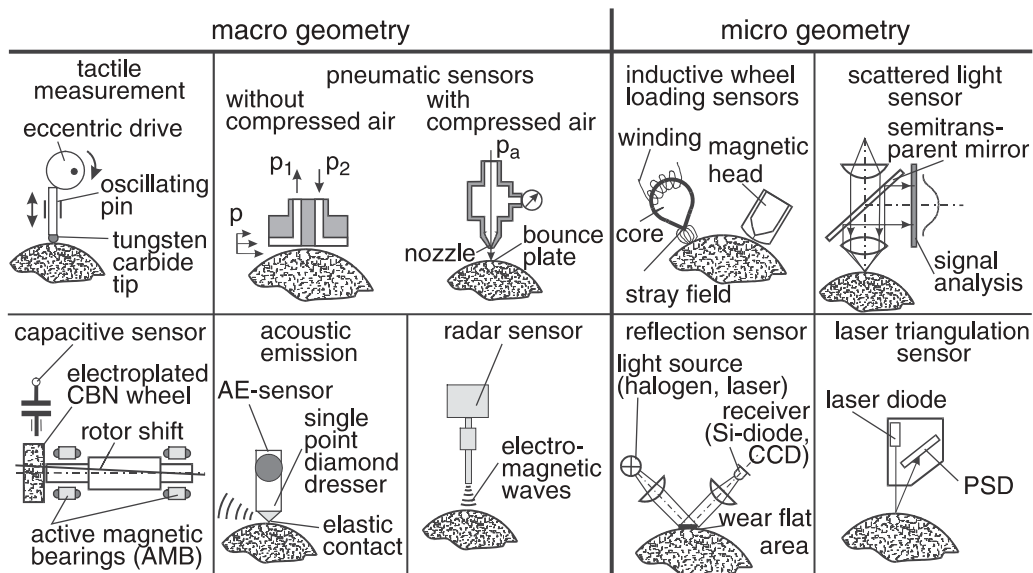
Sensors for grinding wheel topography measurement
